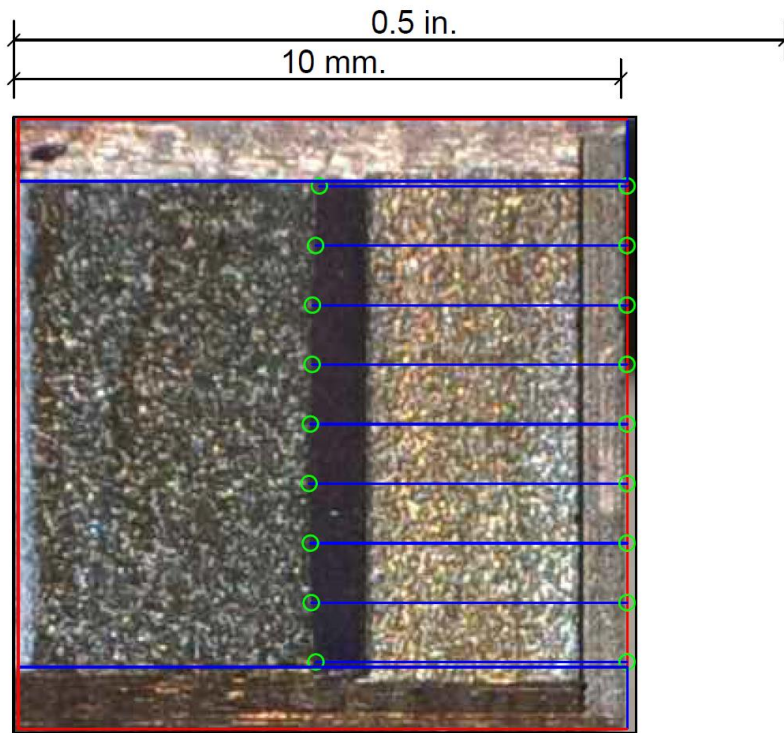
Specimen J9' Fracture Surface
